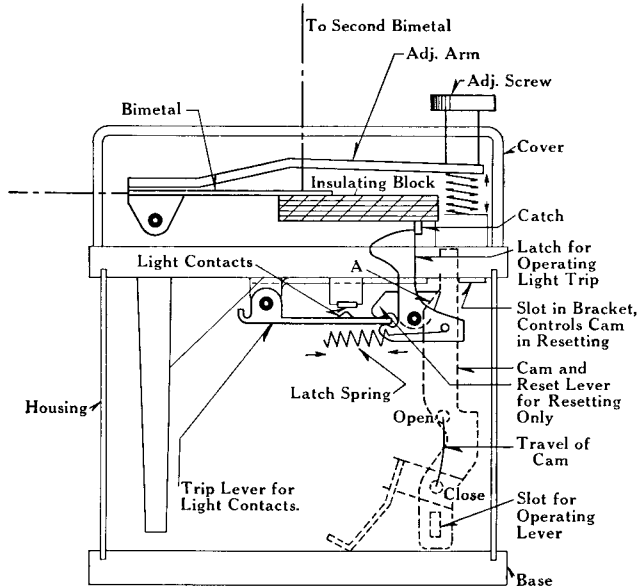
SIDE VIEW TR THERMAL RELAY COVERS REMOVED
